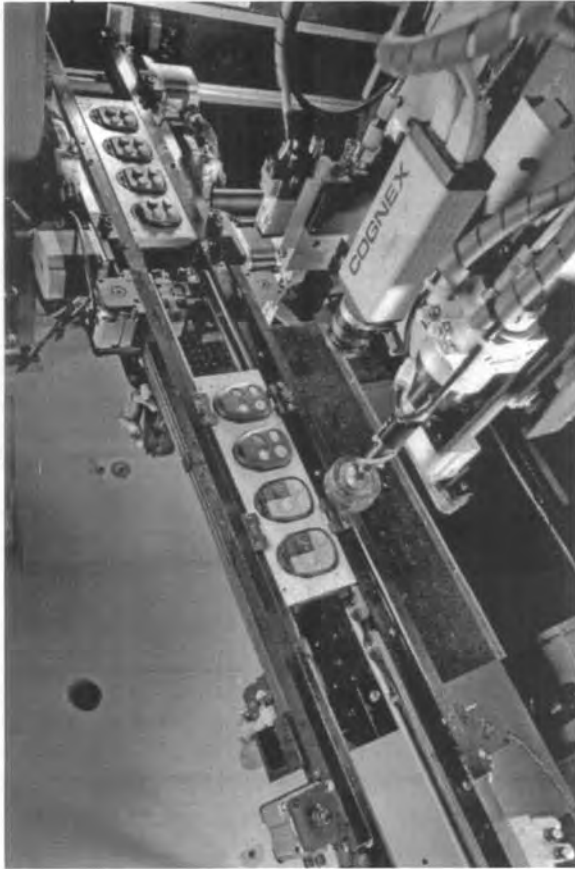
G10 A robotic pick and place machine assembles parts to an automotive remote key pad. (Courtesy Universal Instruments.)
